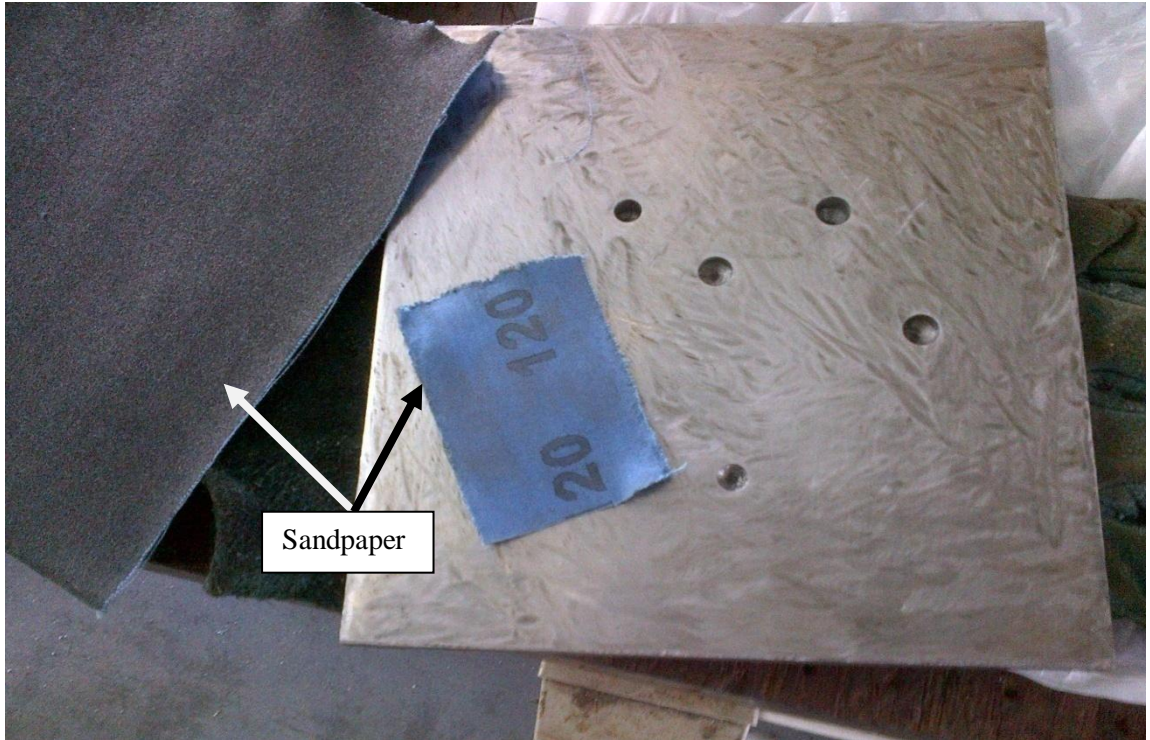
Sample after grinding and before smoothed by sandpaper
